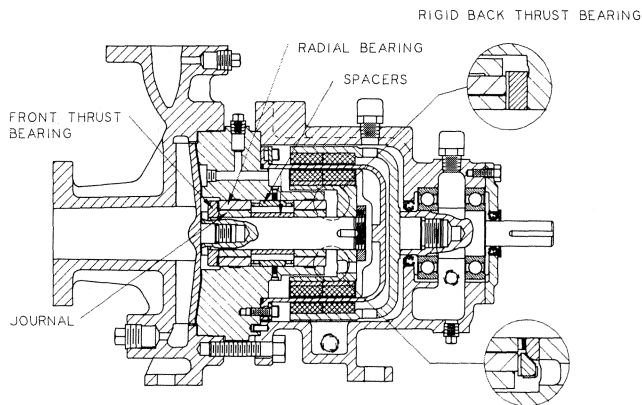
Thrust Bearing Arrangements for Sealless Magnetic Drive Pump.
